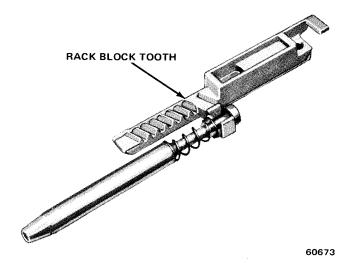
Assembling Lock Bolt and Lock Rack
